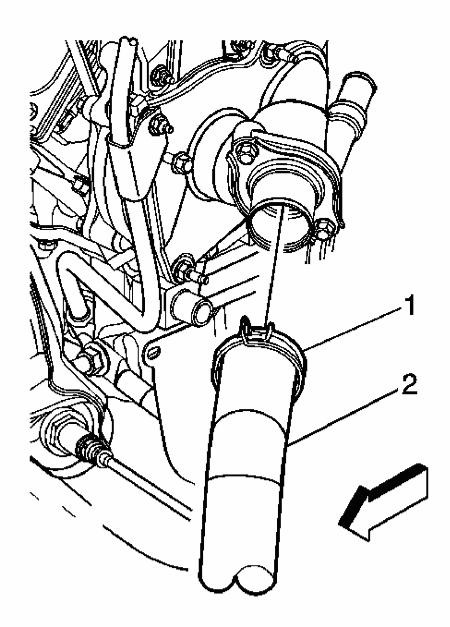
View Of Radiator Outlet Hose At Thermostat Housing Courtesy of GENERAL MOTORS CORP.
